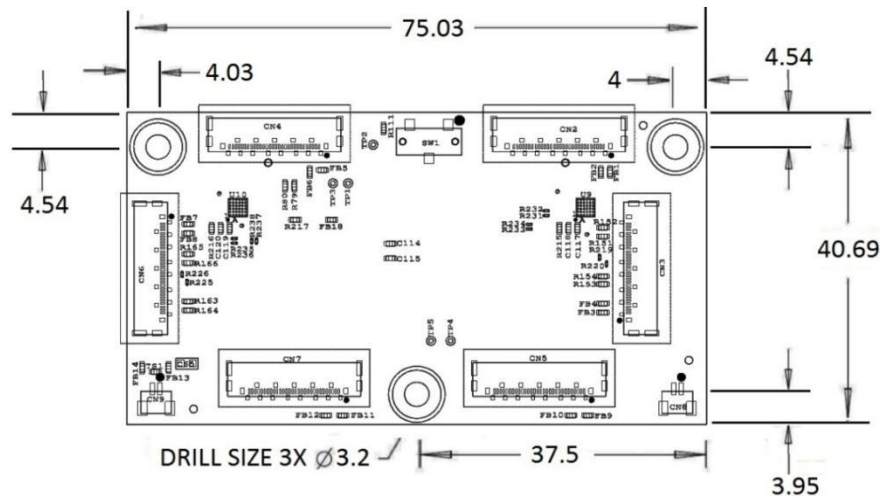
Front Portion of e-CAM22_CUXVR Base Board Mechanical Dimensions
